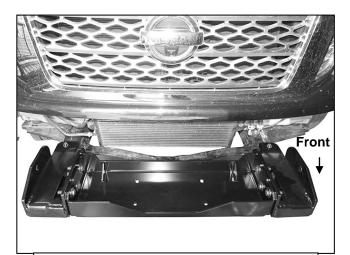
Driver/left Frame Bracket and Support Bracket pictured from below
